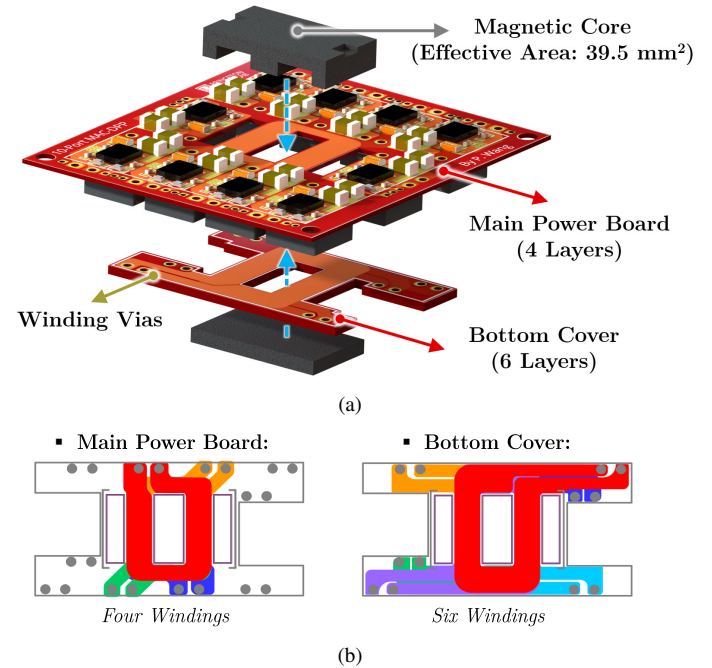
(a) 3D assembly view of the stacked PCB planar magnetics; (b) Winding patterns on main power board (4 layers) and bottom cover (6 layers).
